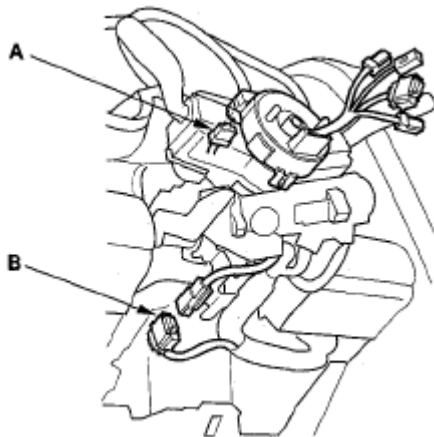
Identifying Dashboard Wire Harness B 5P Connector
